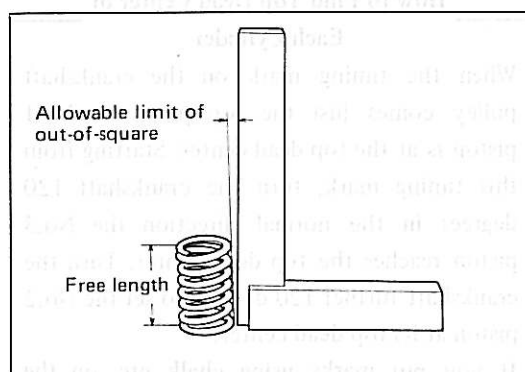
Measuring Valve Spring (Free Length & Squareness)
